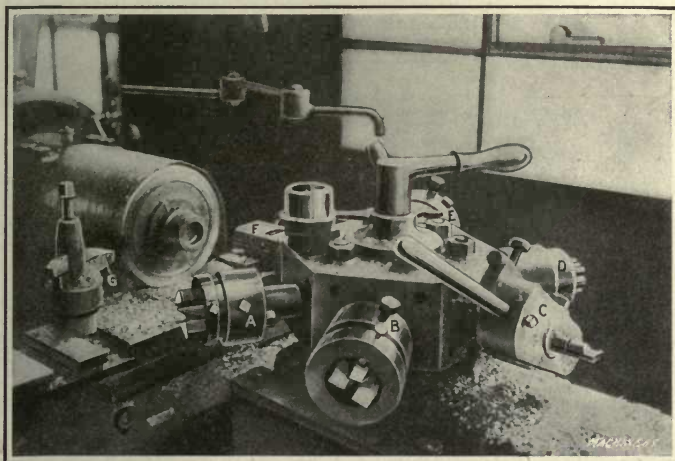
Set-up on Warner & Swasey Brass-working Lathe for performing First Series of Machining Operations on Fuse Body
